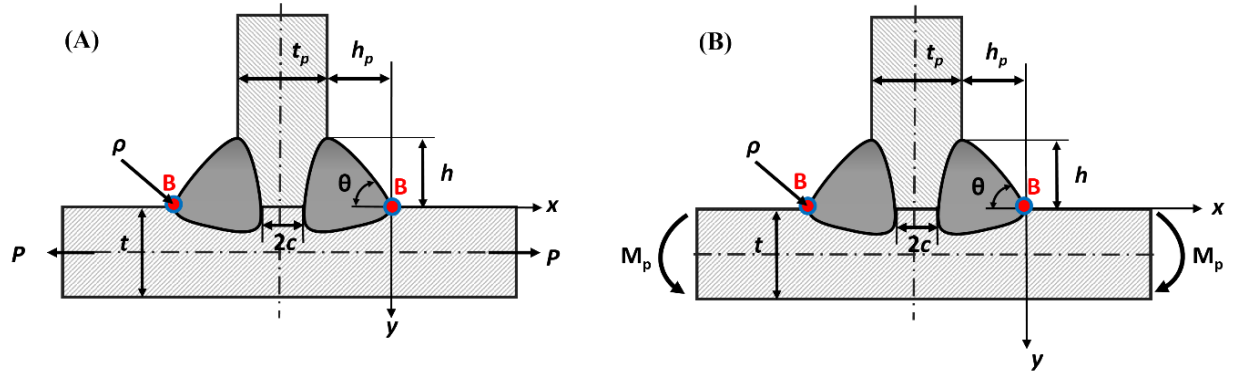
Terminology for a non-symmetric fillet weld on the base plate of a T-joint weld subjected to: A) Pure tension, and B) Pure bending loading [61]
